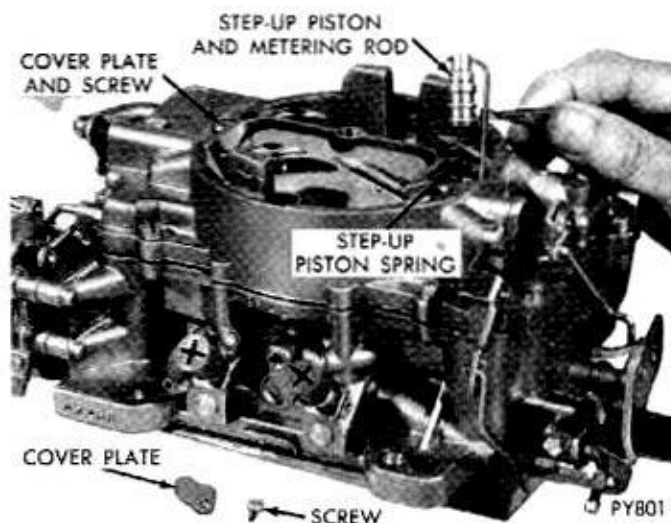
Removing or Installing Step-Up Pistons and Rods
